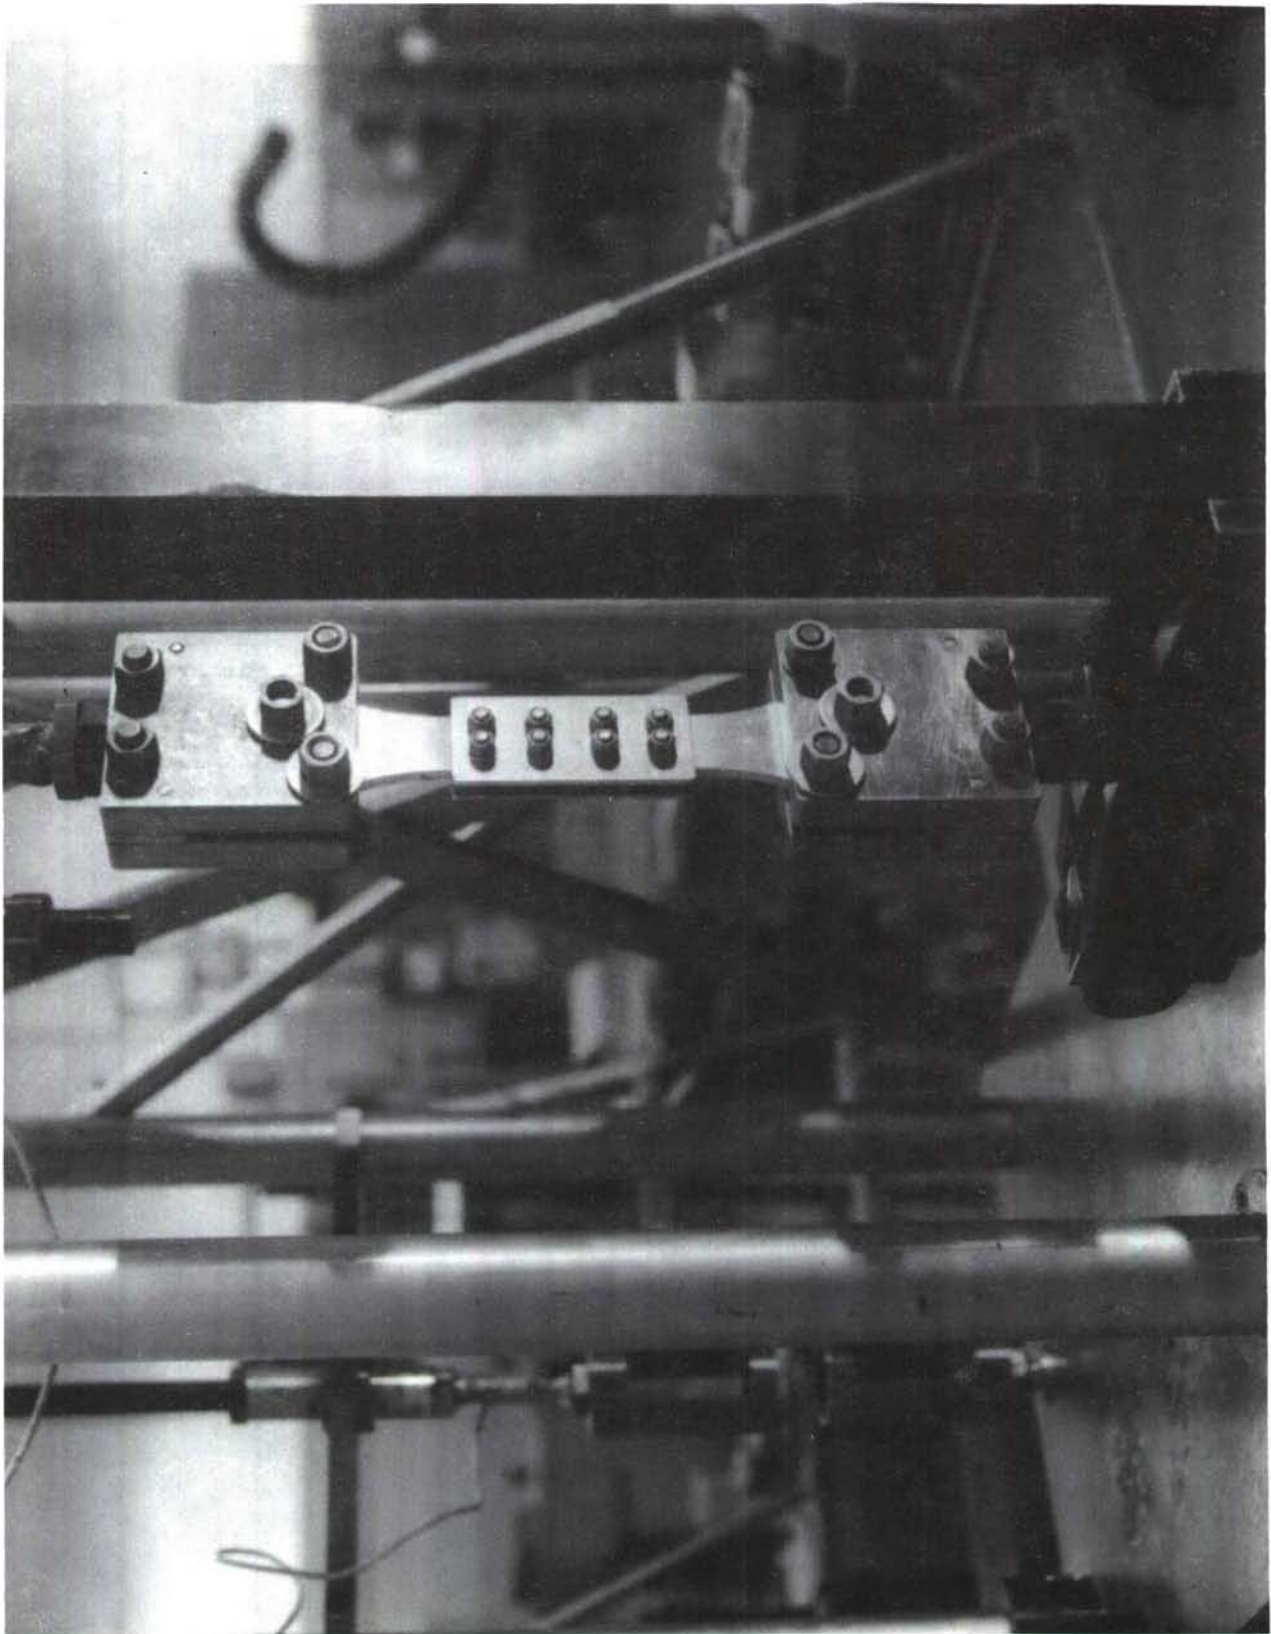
8 Bolt Joint Specimen Installed in Grips.
